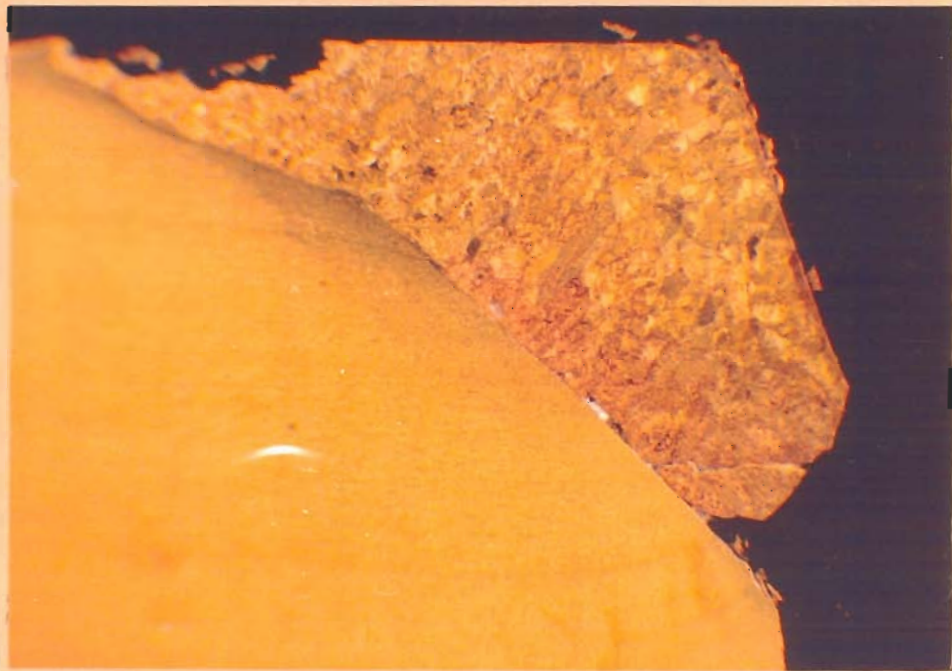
Another Cross Sectional View of Incomplete Penetration in Circumferential Weld
